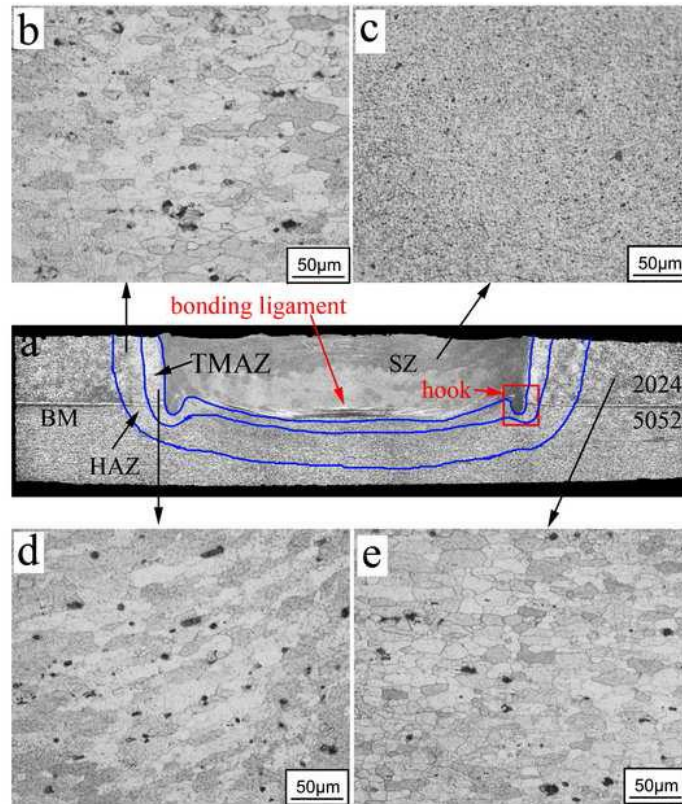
Macrostructure and Microstructure of the weld nugget [39]
